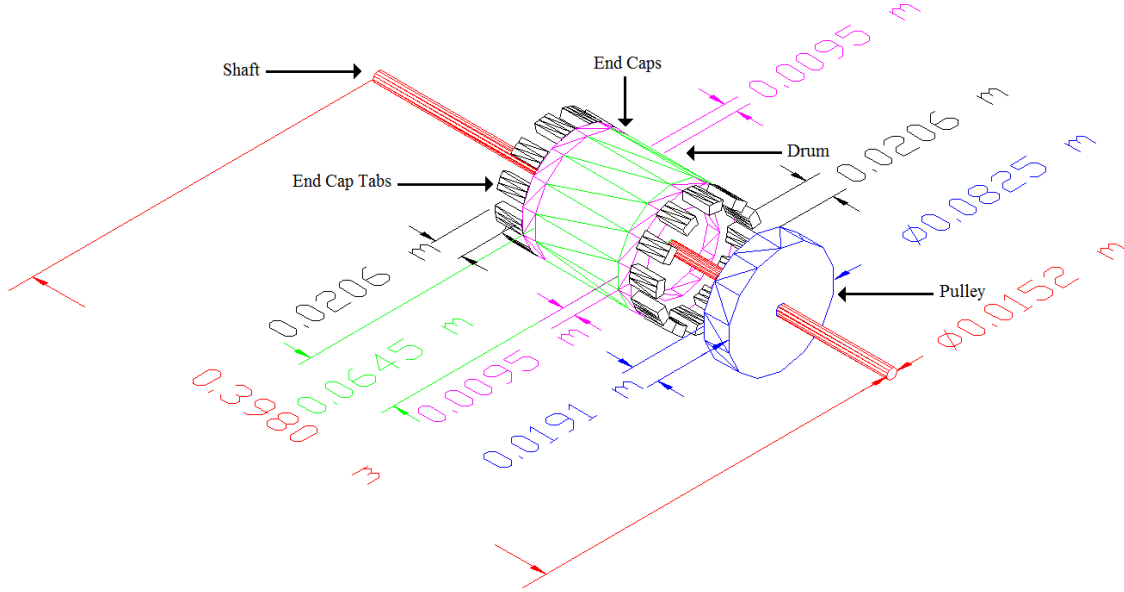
AutoCAD Drawing of Rotor and Dimensions
